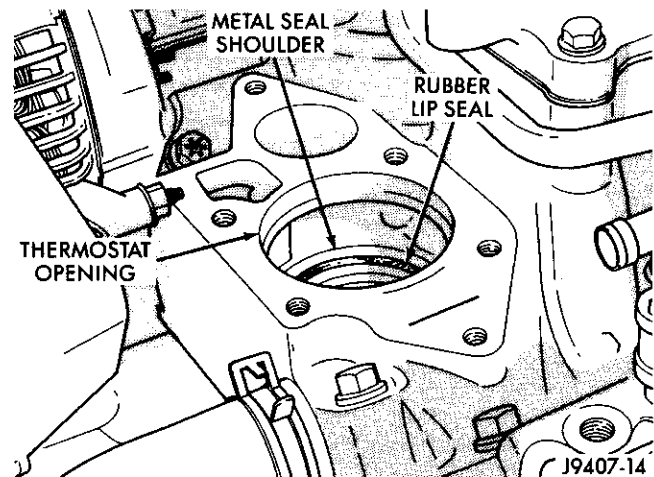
Thermostat Seal—8.0L V-10 Engine
